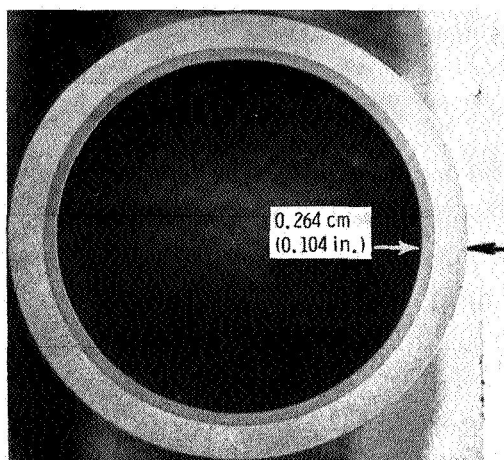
Transverse section of Tantalum/316 stainless steel tubing produced by explosion welding (ref. 24). Unetched.
